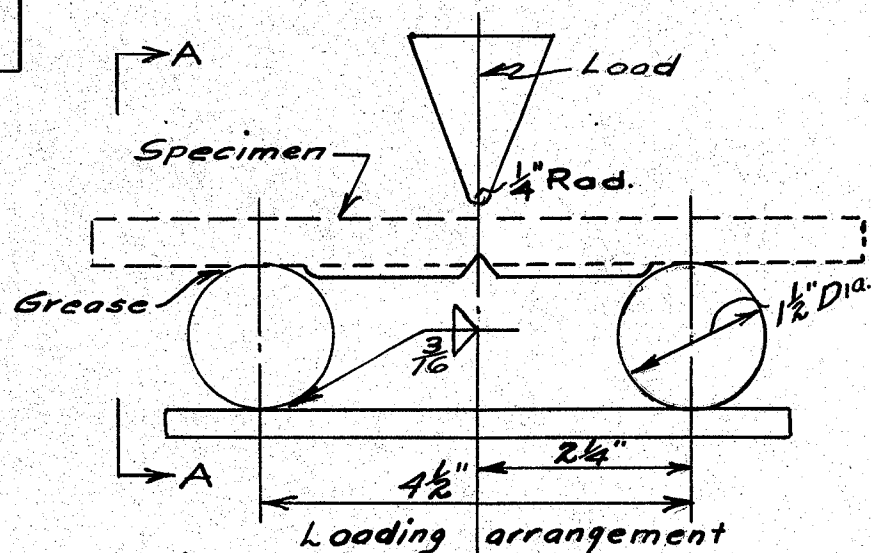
Apparatus used to perform the Kinzel notch bend test.
